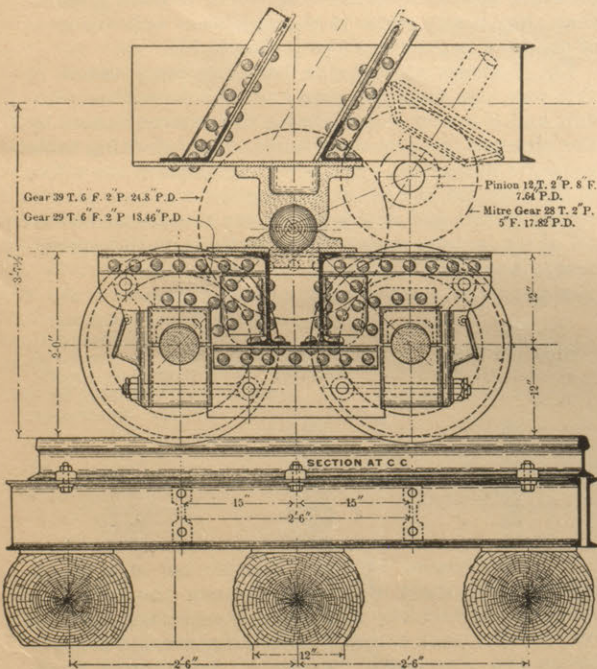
DETAIL VIEWS OF CARRIAGE SHOWING POWER ATTACHMENT.
